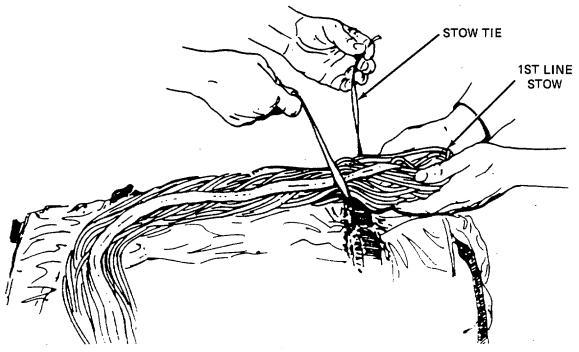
Suspension Line Stow Ties Installed on Retaining Strap Loops.
